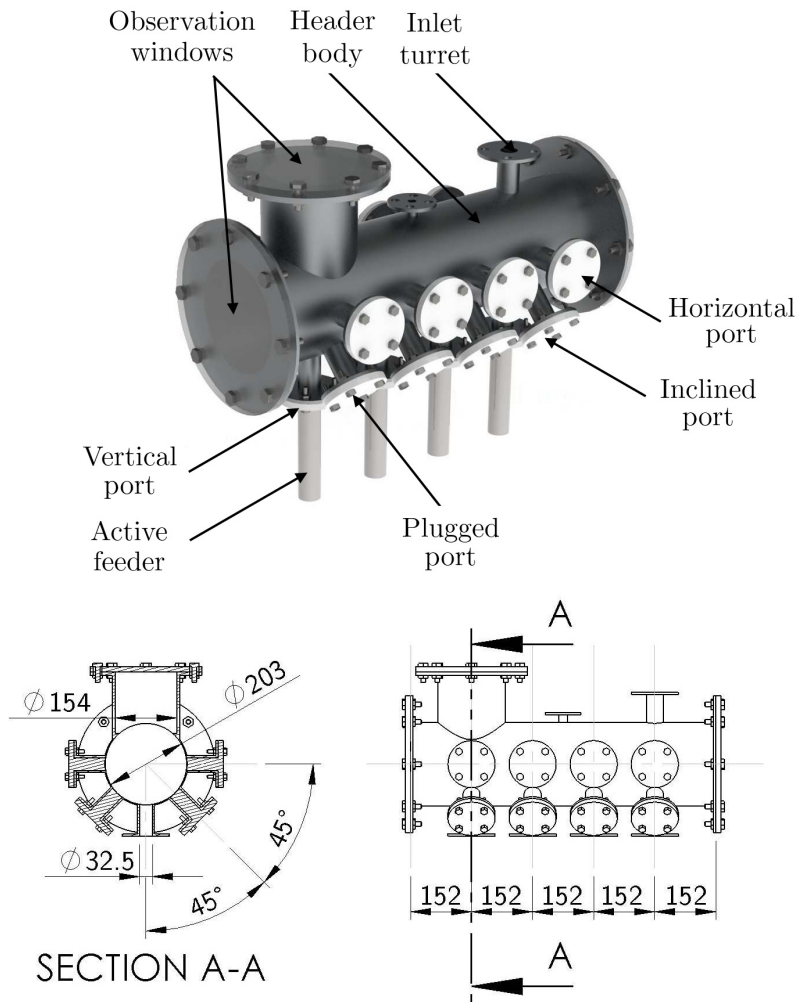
Three-dimensional (top), cross-sectional (bottom left) and side (bottom right) views of the modular header. All dimensions are in mm.
